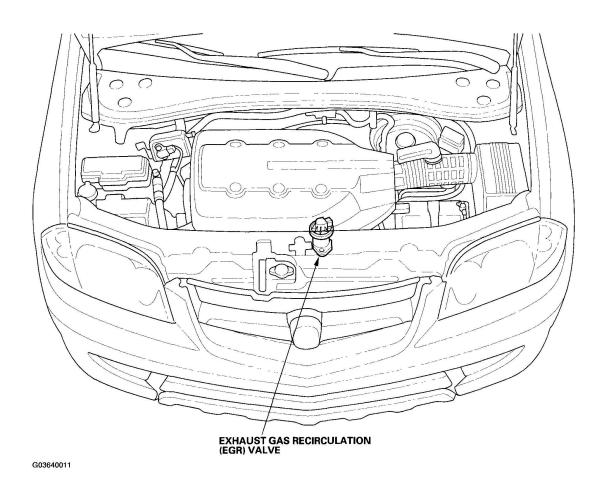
Identifying Exhaust Gas Recirculation (EGR) Valve Courtesy of AMERICAN HONDA MOTOR CO., INC.
